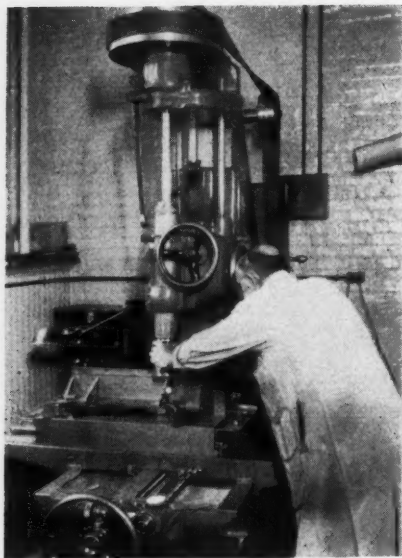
Jig-boring machines have eliminated the necessity of using "buttons" in spacing and drilling holes in jigs and dies.
